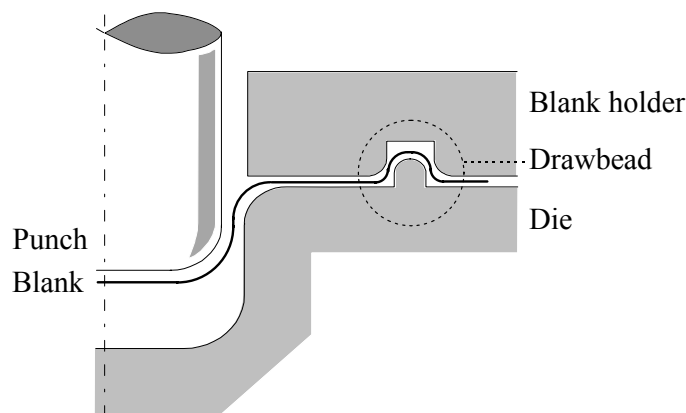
Principle of the deep drawing process with a drawbead.
